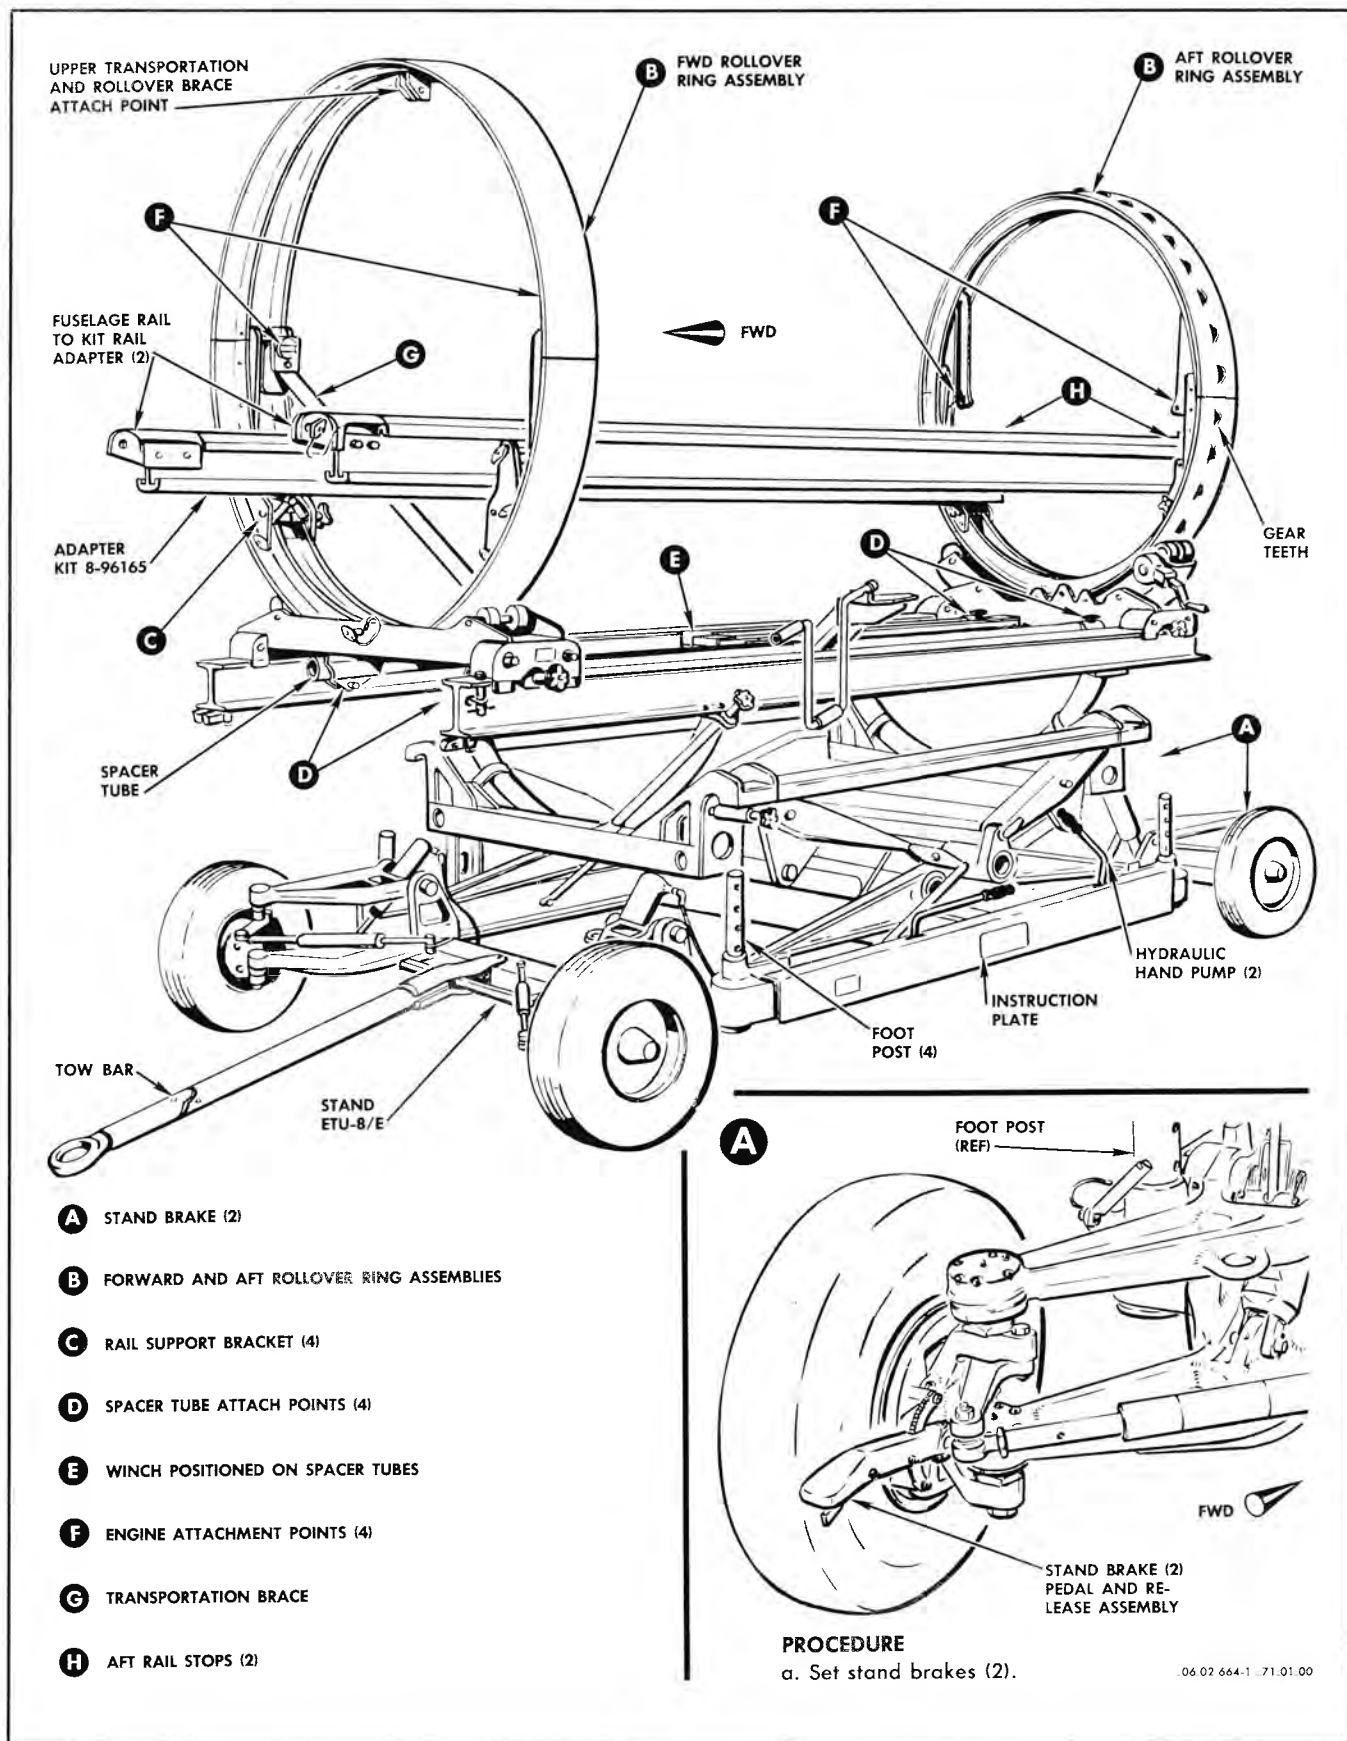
Engine Stand Preparation, Type USAF ETU-8/E Using Adapter Kit 8-96165 (Sheet 1 of 3)
